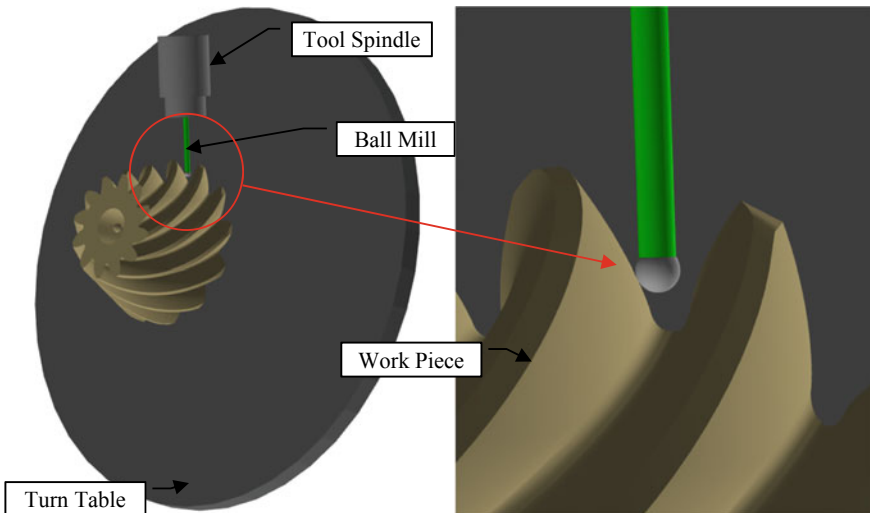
Heel chamfering with BM—spiral bevel pinion
